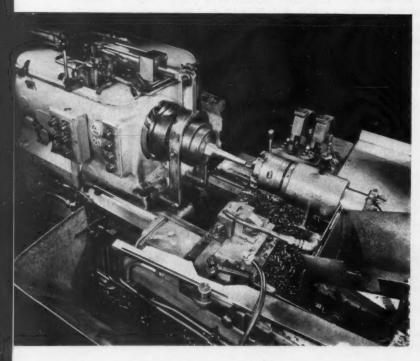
Close-up view of lathe seen in heading illustration. At this point, one end of the trailer axle has been contour-turned and threaded.
